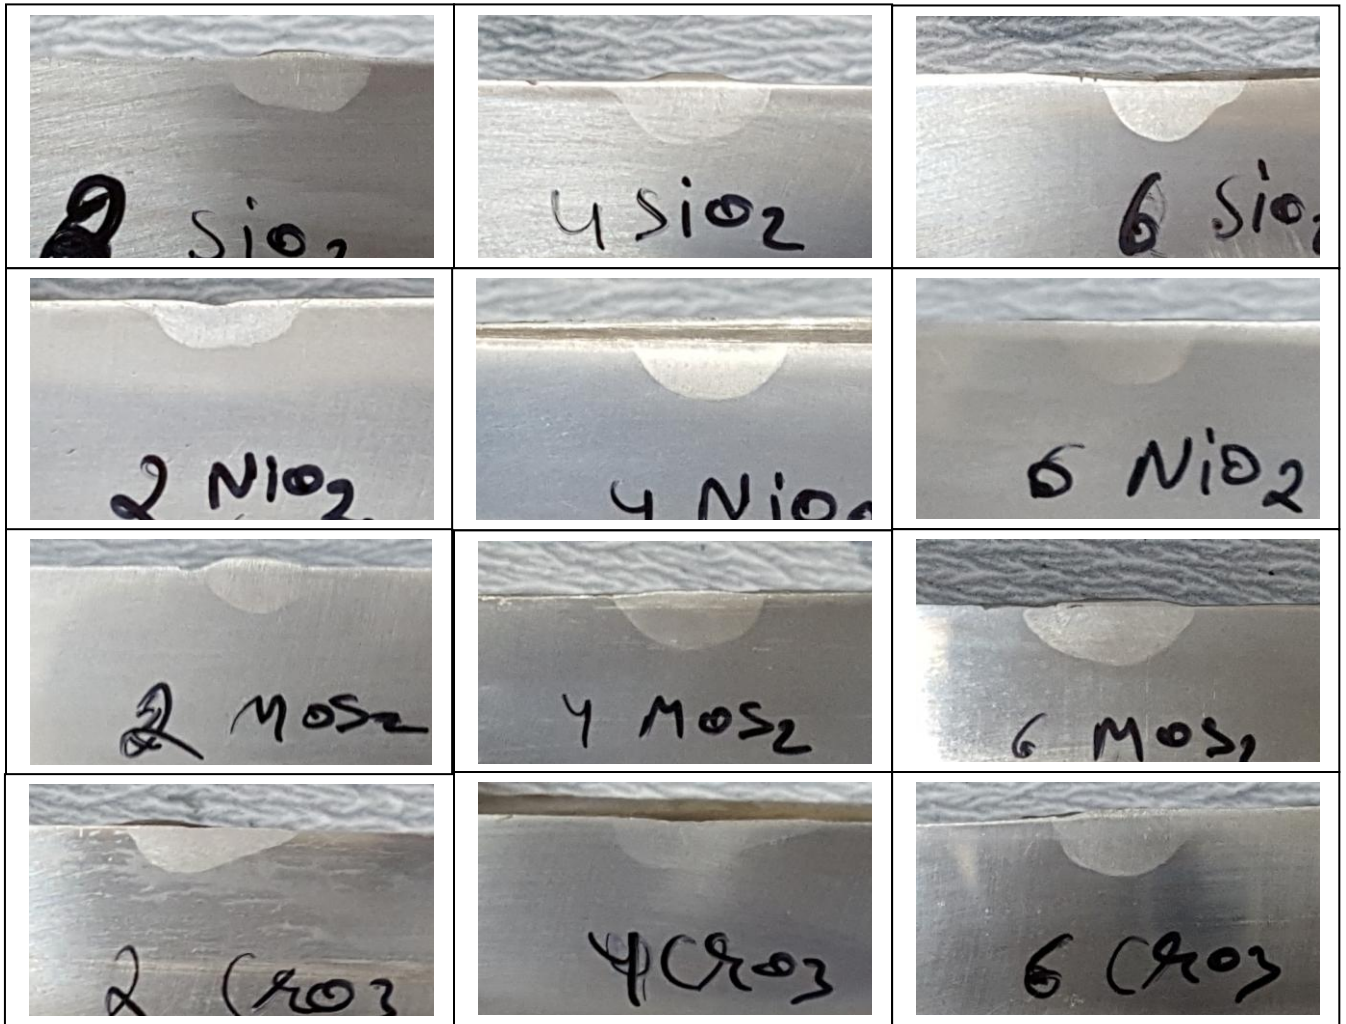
Bead appearance for TIG and ATIG welding samples for 2 sec, 4 sec and 6 sec at current- 190 A
